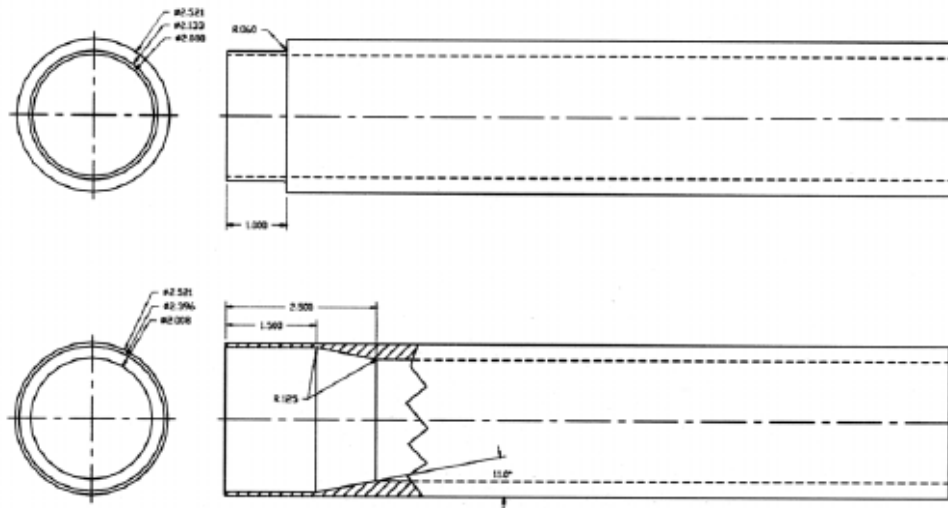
Lap joint configuration for joining end-plugs to fuel pin cladding in magnetic impulse welding. [42]
